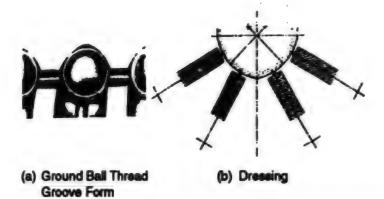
CBN Wheel CNC Dressing for Ball Thread Groove Grinding
